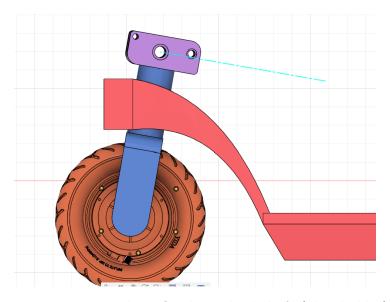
Hinge base fixed to wheel shaft (placeholder)
